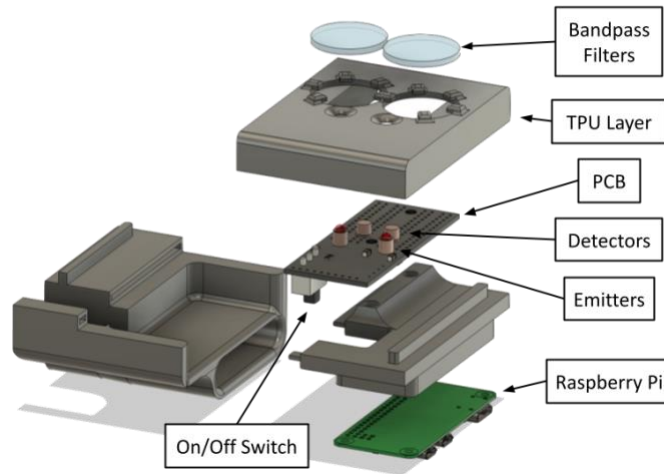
EXPLODED VIEW OF FINAL DEVICE
